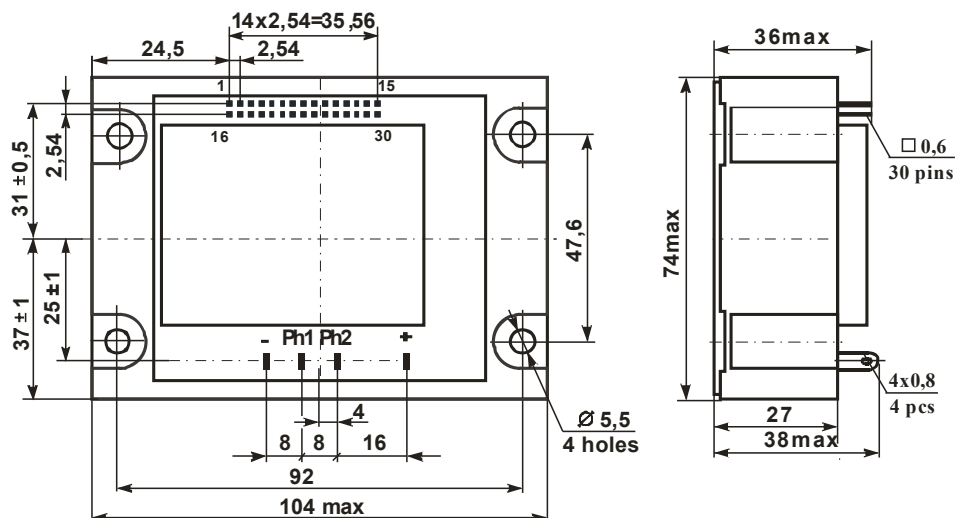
Overall dimensions of BDCDMM-5,10-1,2,6 power assembly type «4»
